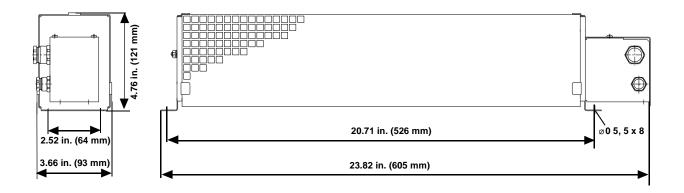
Mounting Dimensions for 460V External Shunt (P/N M.1302.7049)
